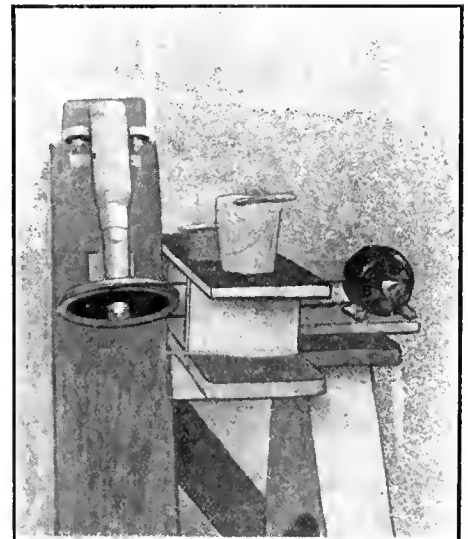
PAINTING SHELLS ON A SPECIALLY CONSTRUCTED PORTABLE MACHINE.
